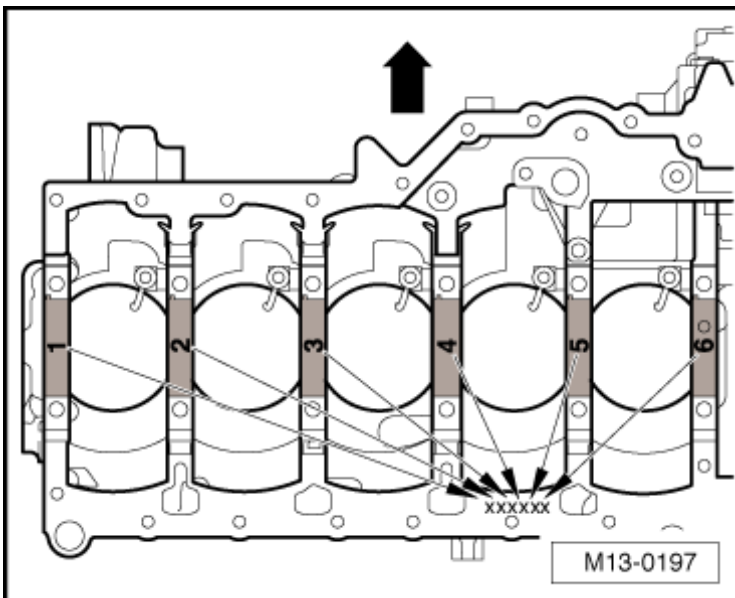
Identification Of Top Crankshaft Bearing Shells
